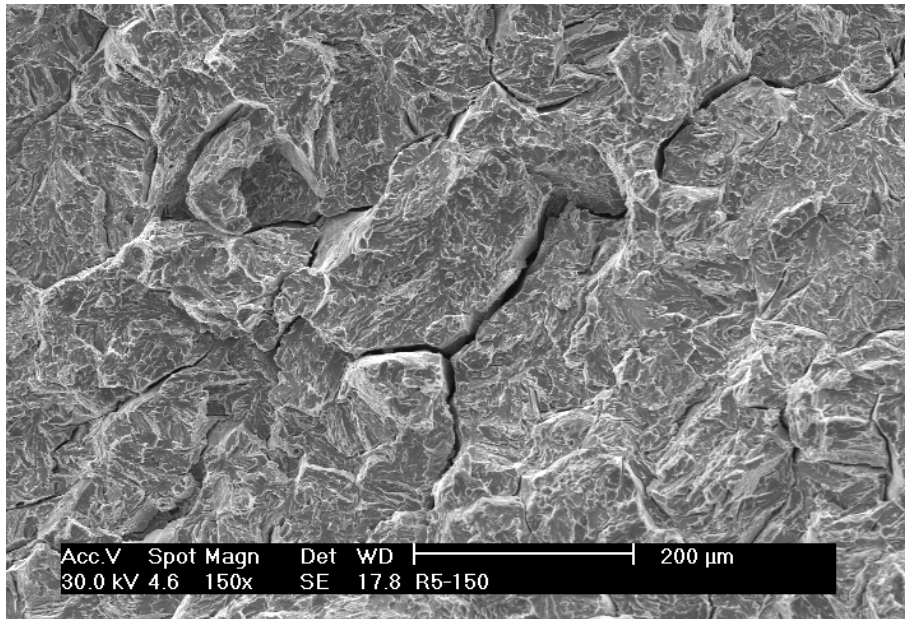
Fracture surface for 5mm notched specimen tested at  $-150^{\circ}\text{C}$ .
